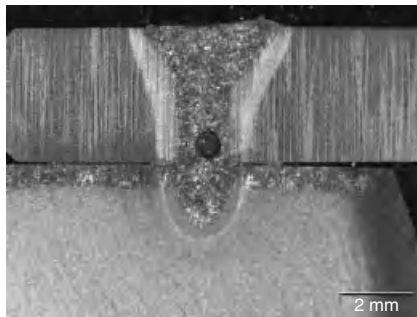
Macrosection of a laser weld. Upper region: ring welded to component. Lower region: part of component after processing. The resulting weld shows a depth of $d = 5.5$ mm.
